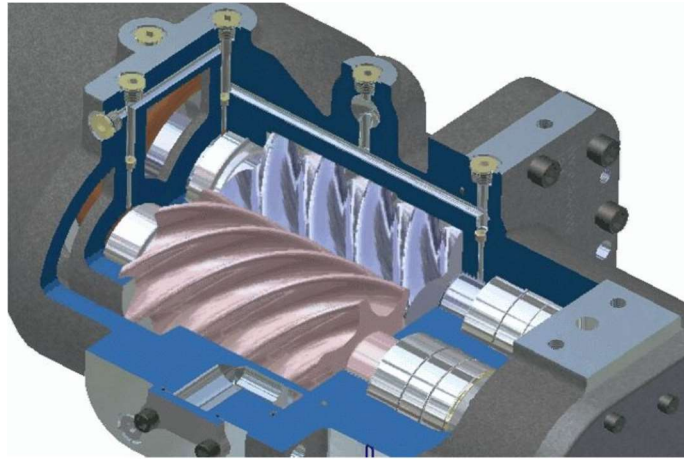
Cut-away of a screw compressor (courtesy of York/Johnson Controls)
